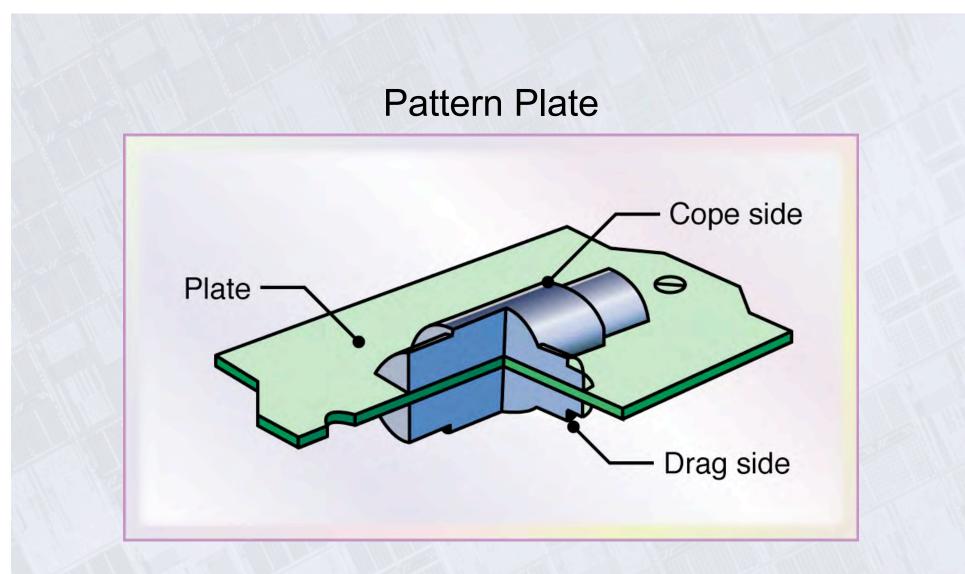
A typical metal match-plate pattern used in sand casting.
